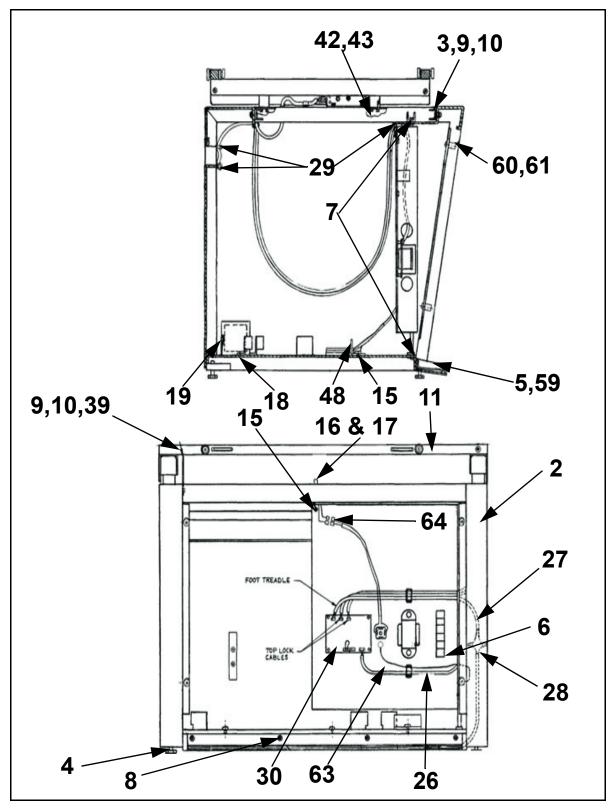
Basic Table Assembly (Sheet 1 of 2)
